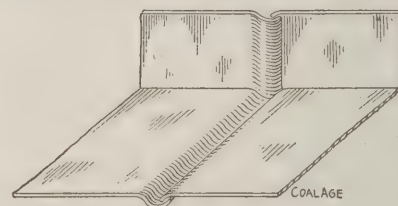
TROUGH JOINTS OF RITCHIE CONVEYOR
